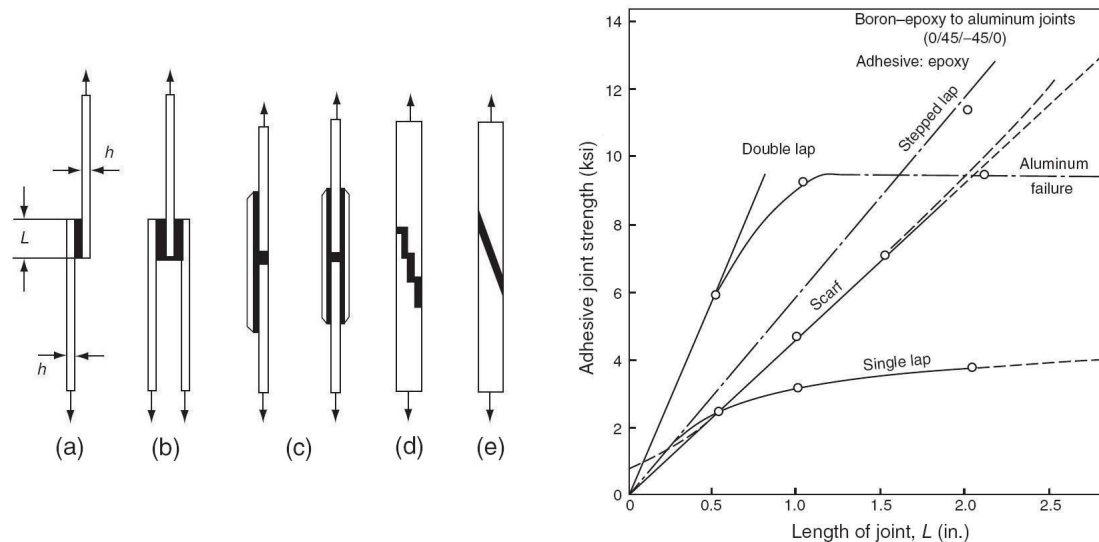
Bonded joints: a) single-lap joint, b) double-lap joint, c) single- and double-strap joints, d) stepped lap joint and e) scarf joint (Mallick 2008).
